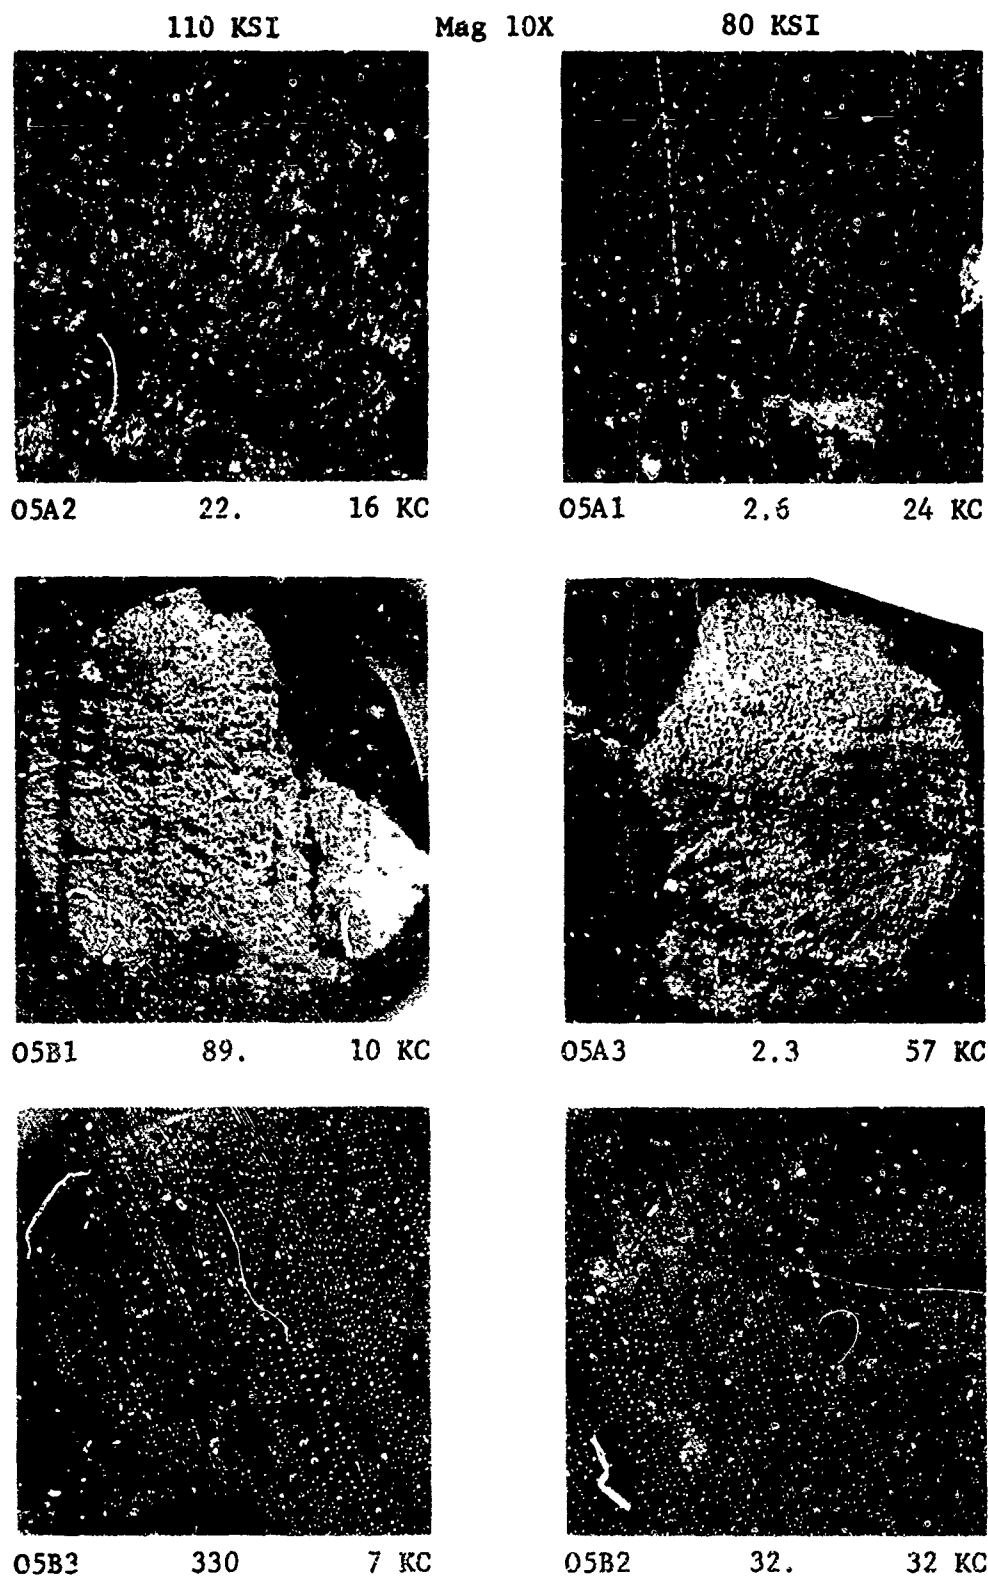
Fracture Surfaces of Failed Fatigue Specimens Series 05-Double-Bond/Two-Axis Diffusion Bonded with "Much Less than Optimum" Deformation
